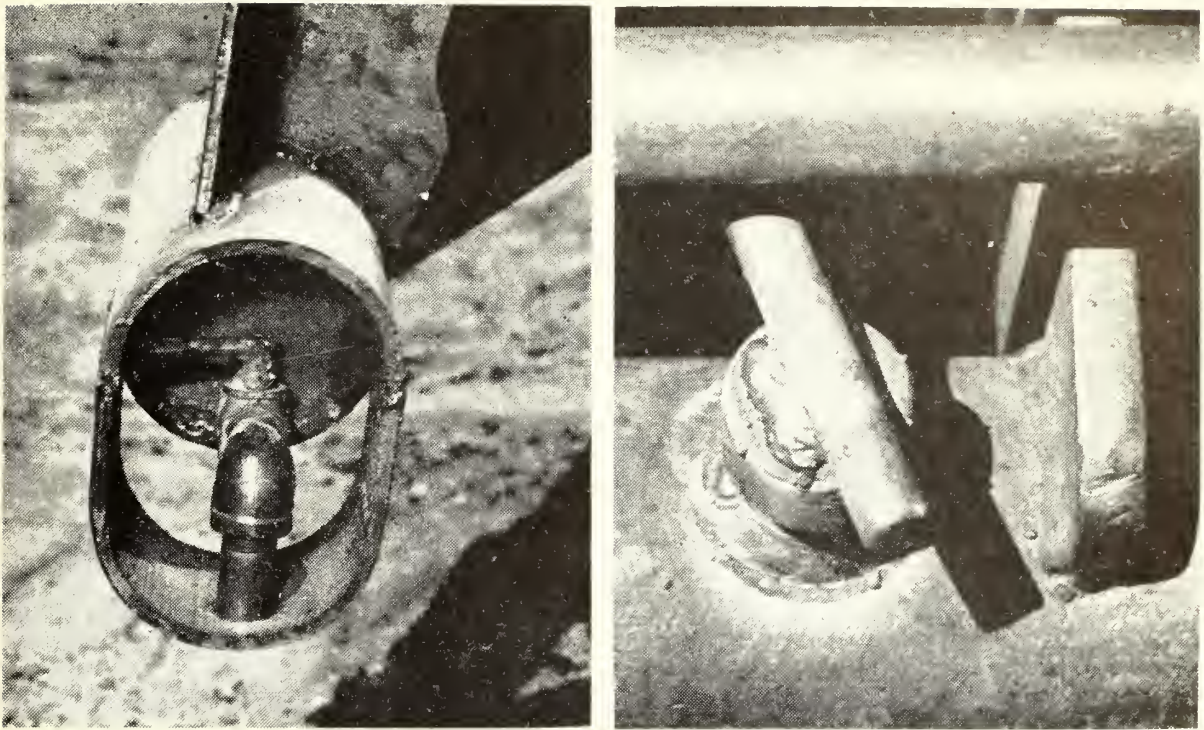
Left*, End of bumper container showing valve installed. *Right*, Intake with pipe cap in place.
